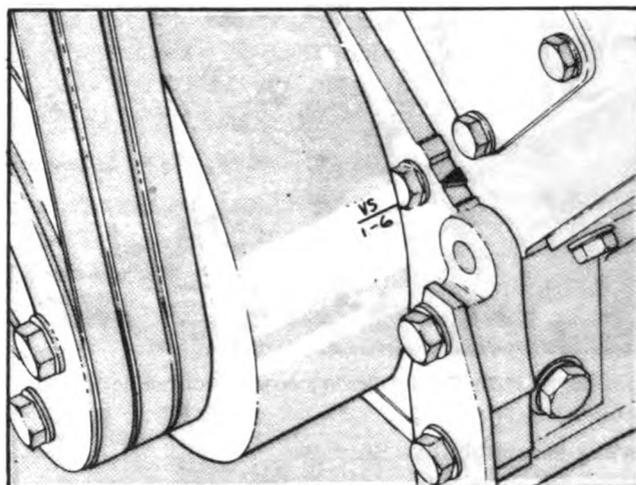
(OM1035L). Valve set marks—V/VT-555, C.I.D. Engine
